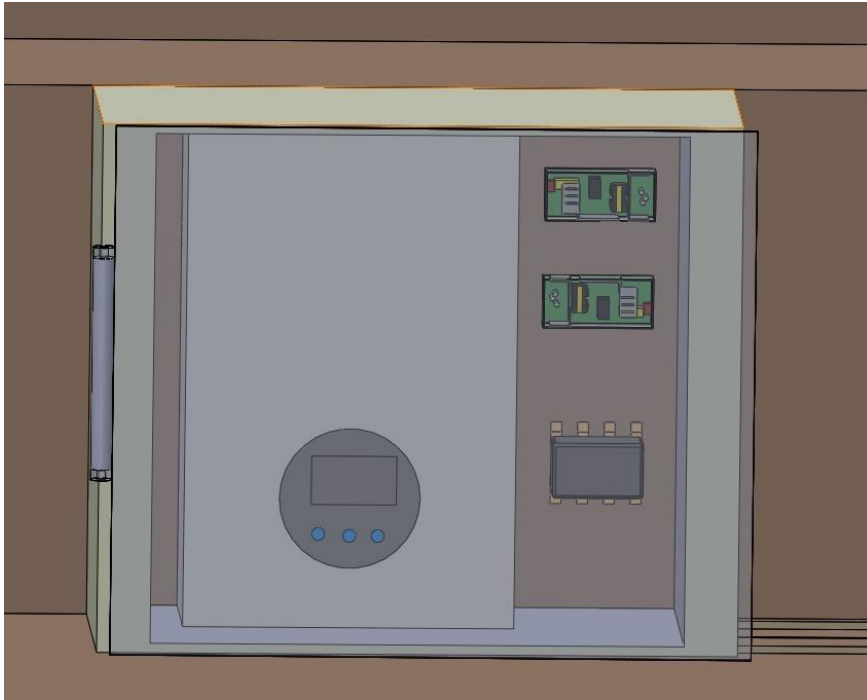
PLC system and control components housing drawing (*SolidWorks CAD*)
